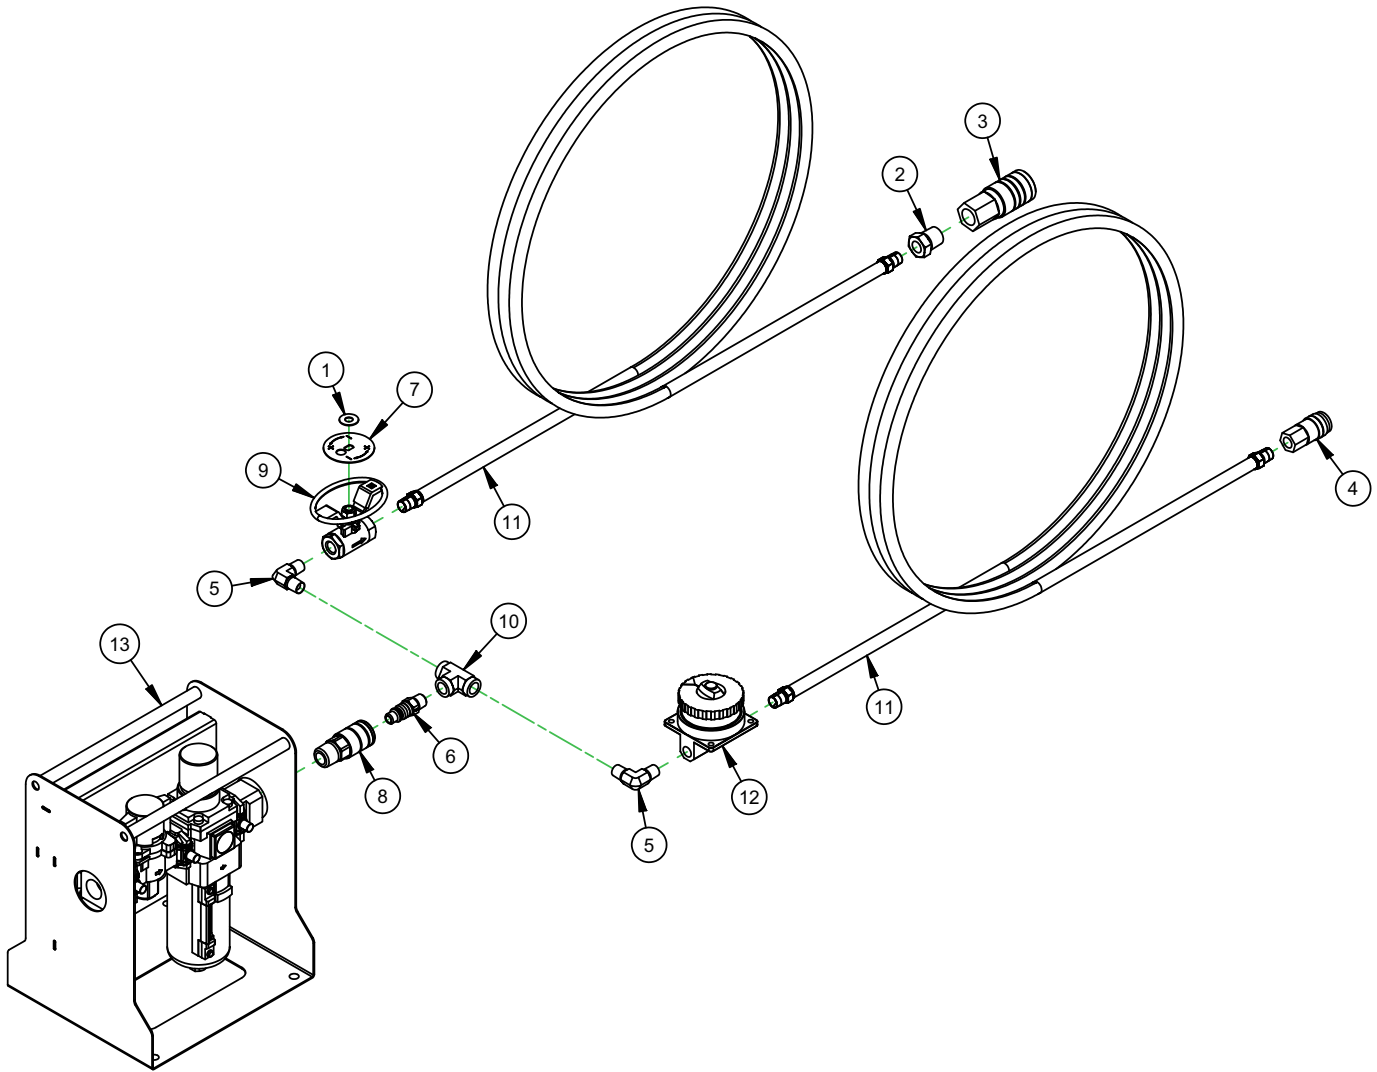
ROTARY UNION ASSEMBLY (P/N 63121)
